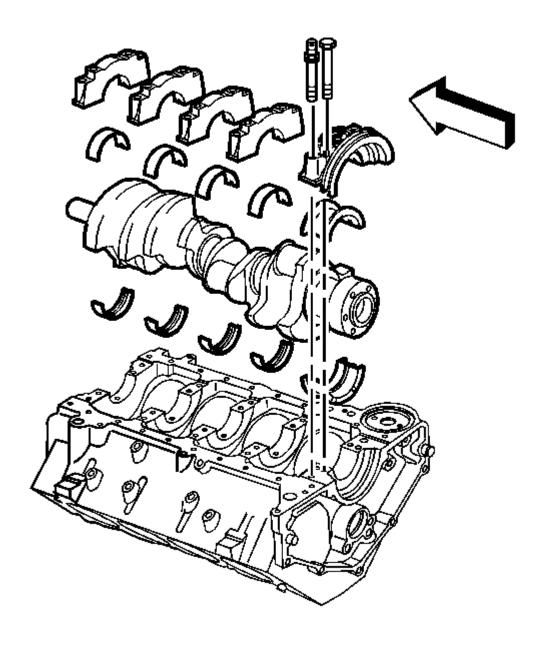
Installing Crankshaft & Bearings Into Block Courtesy of GENERAL MOTORS CORP.
